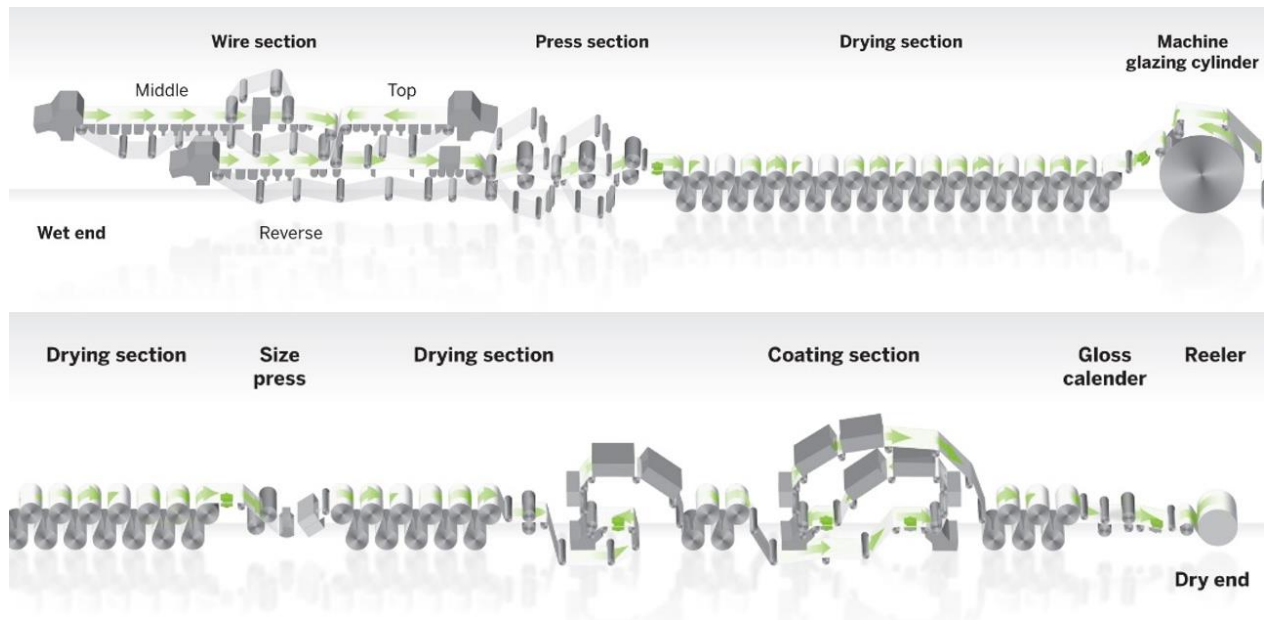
Layout of the typical folding boxboard machine (Metsä Board, 2021b)
